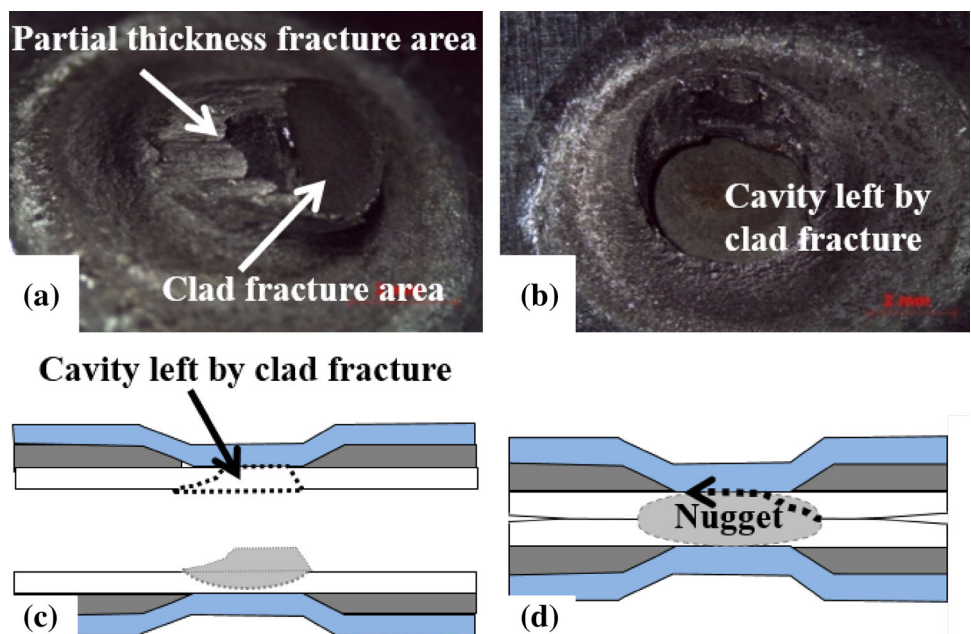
Partial thickness-partial clad-bond fracture: a lower sheet, b upper sheet, c schematic diagram showing the fracture behaviour, d schematic diagram showing the crack path
